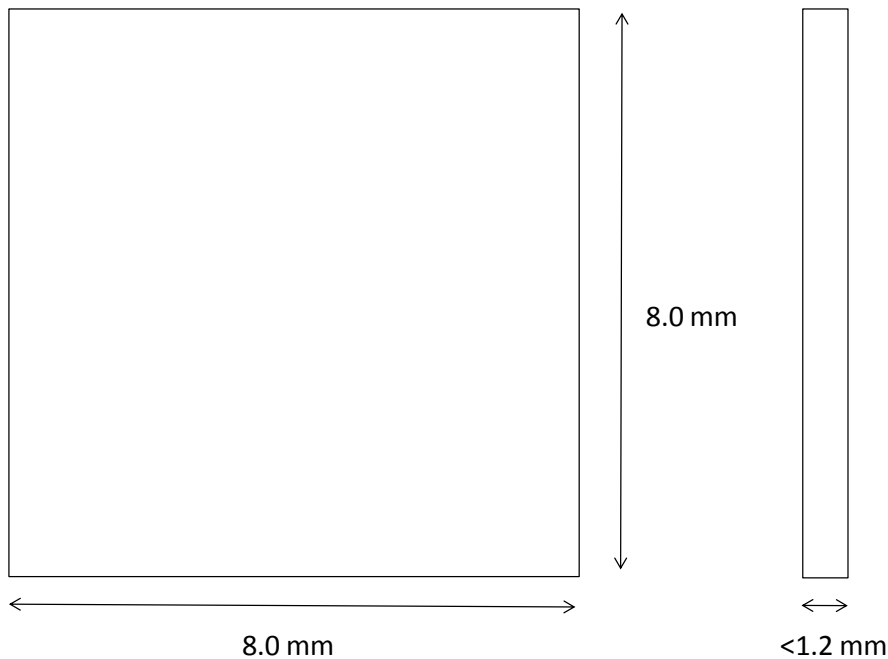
Mechanical drawing, 44 pin Quad Flat No-Lead (QFN) package.
